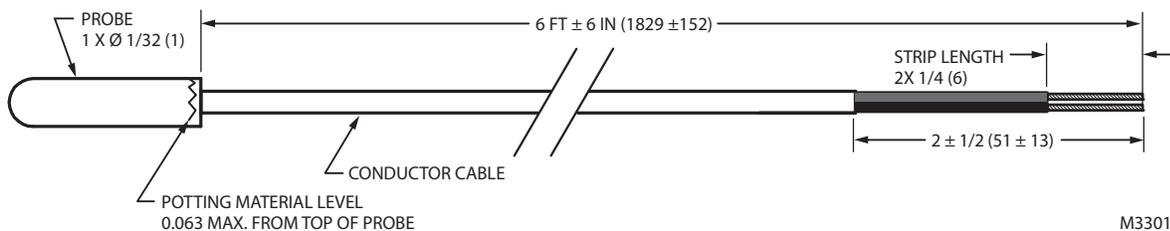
C7021N, C7023N, C7041N dimensions in in. (mm).
